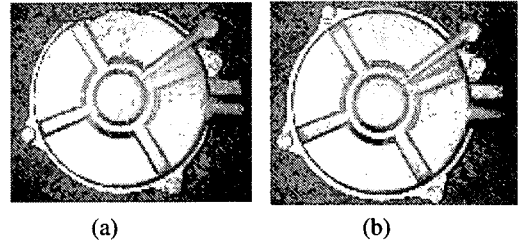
(a) Prototype produced by conventional plaster casting process, (b) Prototype produced by plaster casting process with pressurized vibration
